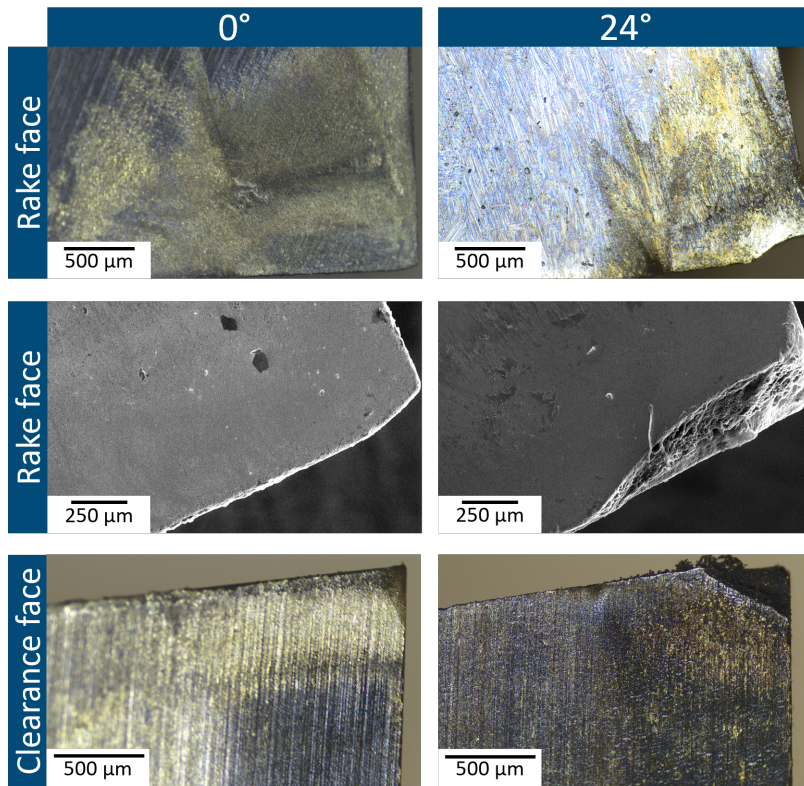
Microscopical pictures of the rake faces and clearance faces of the tools in CW511L after 208 min.
